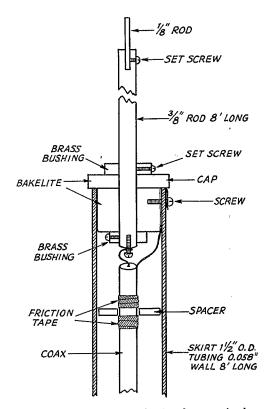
Cutaway view showing the center insulator in place in the skirt and the method of connecting the coax line.
